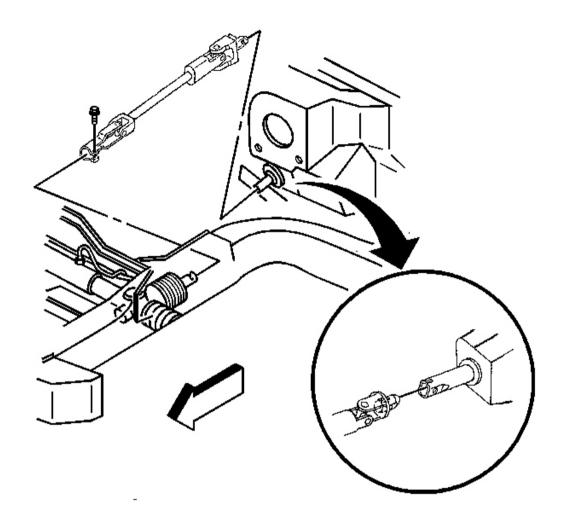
Steering Column, Upper Coupling & Bolt Courtesy of GENERAL MOTORS CORP.
